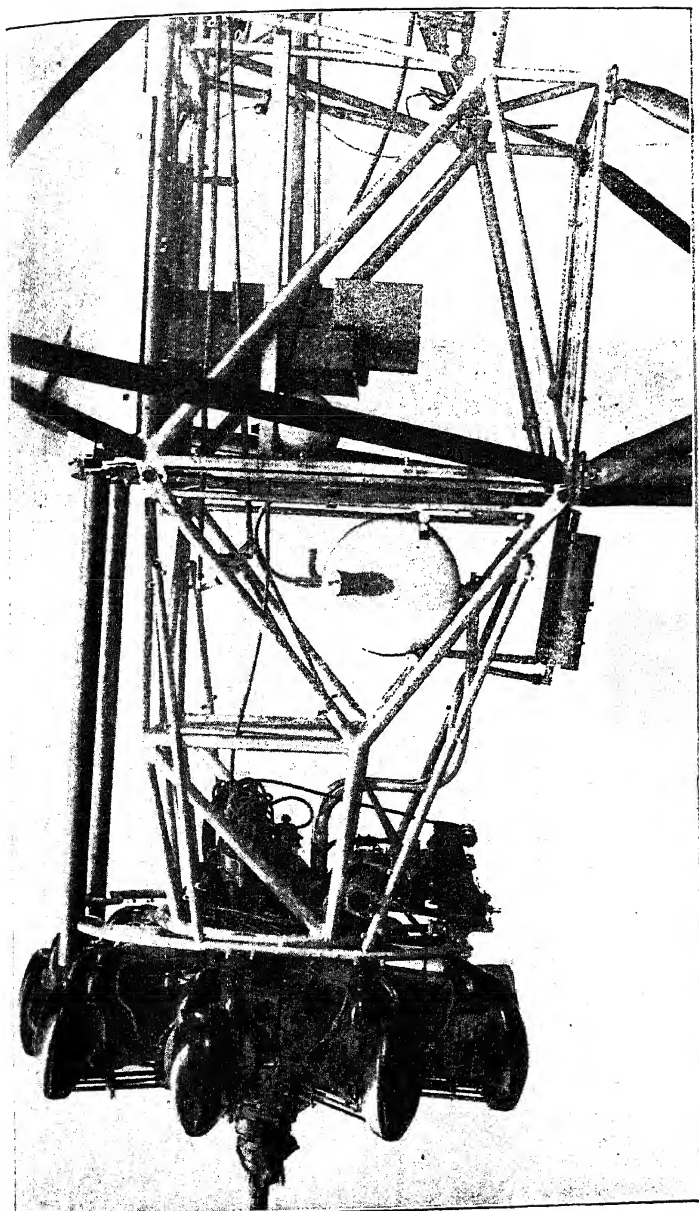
"JUPITER" ENGINE MOUNTING IN FOKKER C-V
